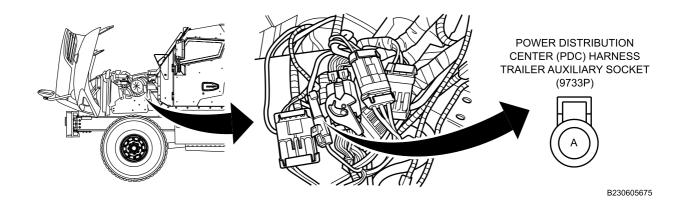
Engine Compartment Under Air Cleaner Assembly.
